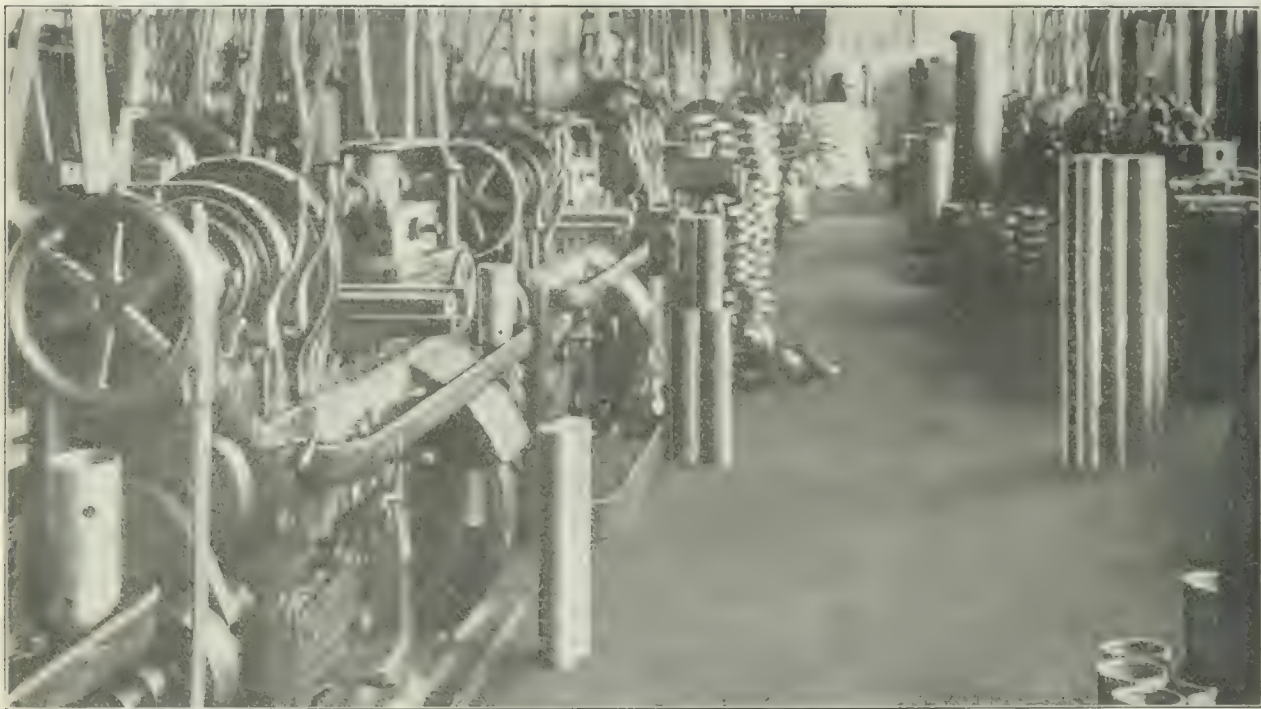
View in the Plant of the E-M-F Company, Showing the Special Automatic Machines Built by the Potter & Johnston Machine Company, Pawtucket, R. I.
